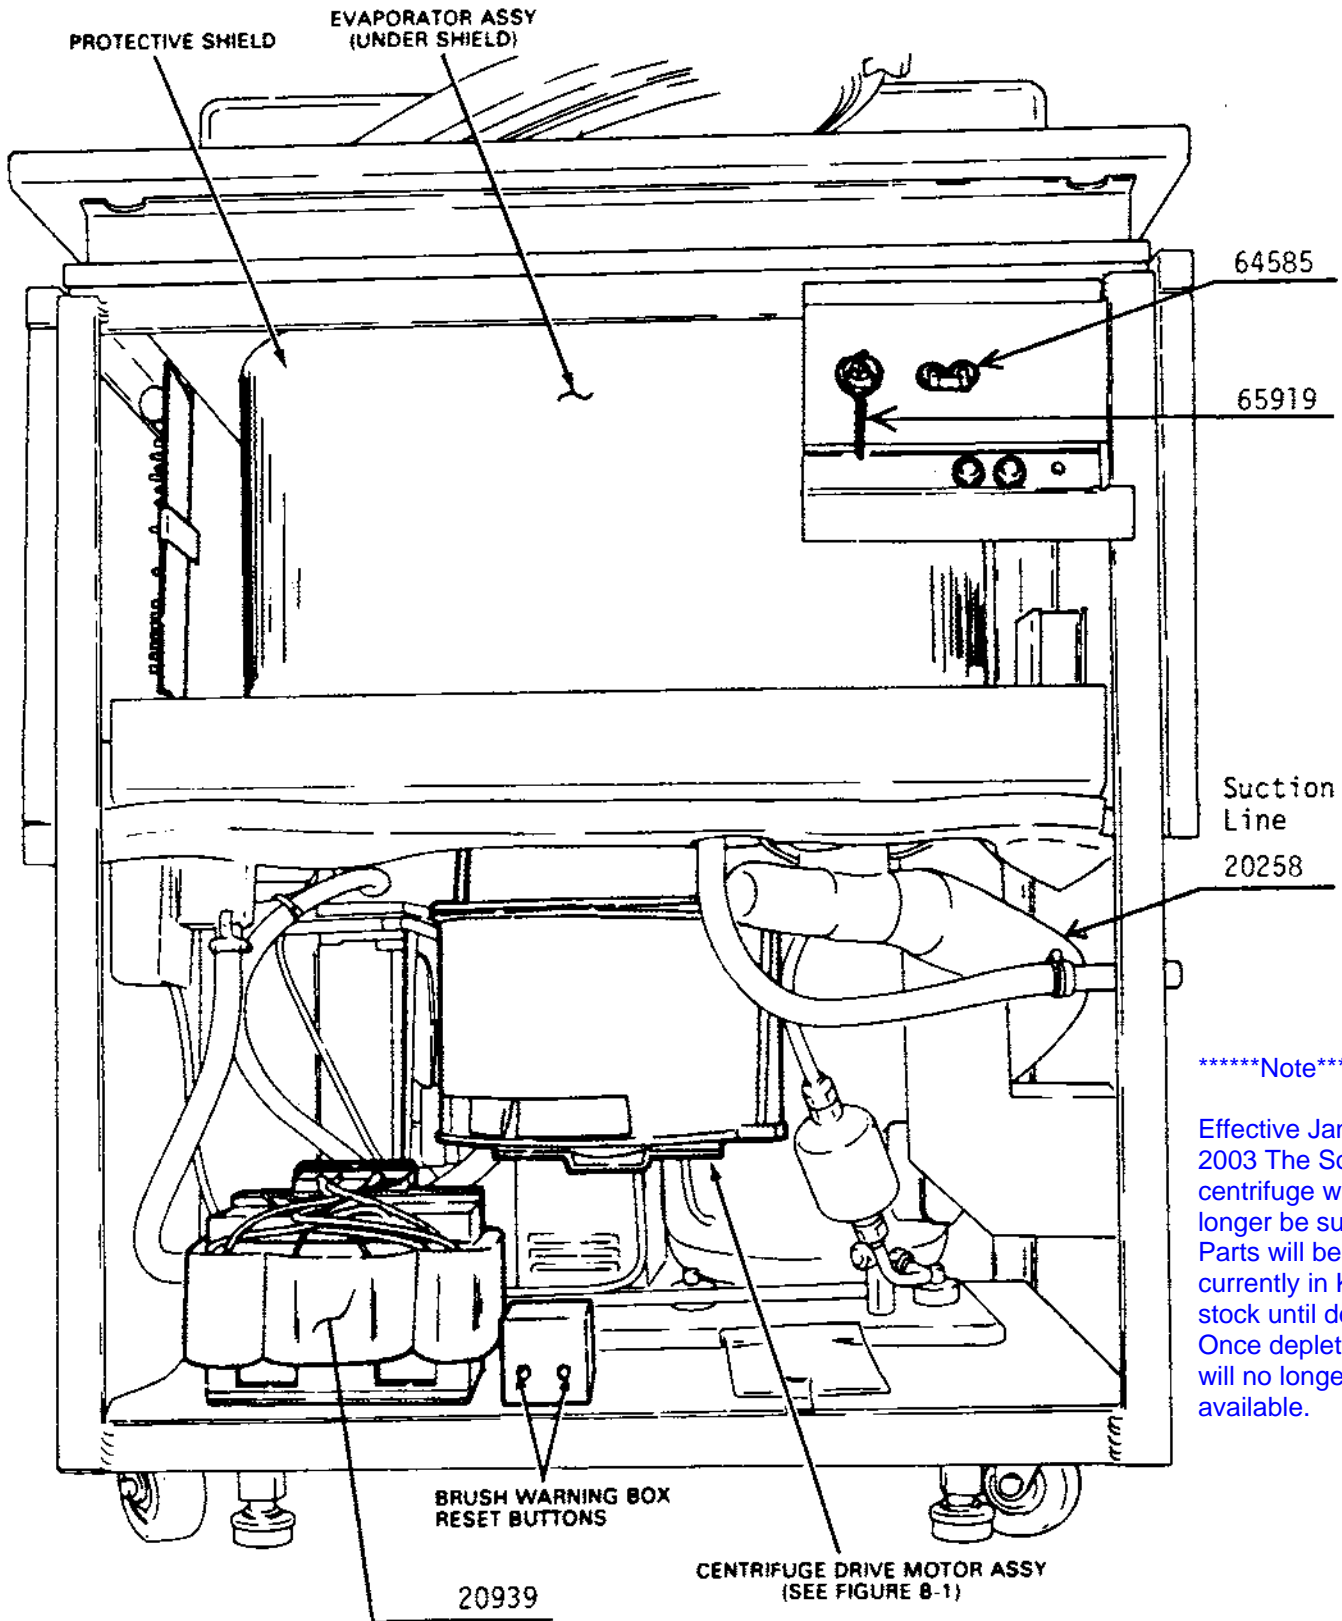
RC-5 Parts Location, Cabinet, Rear View
